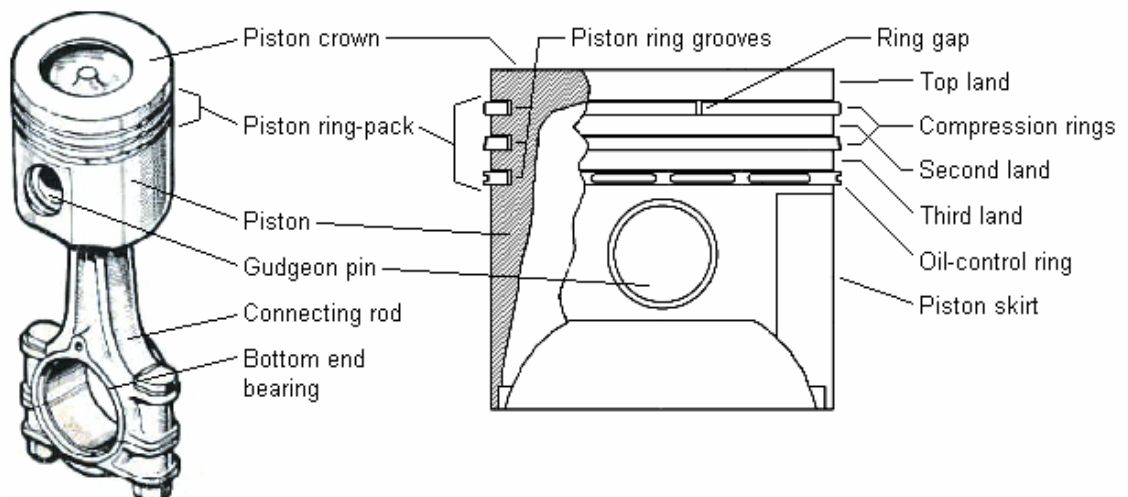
Schematics illustrating piston and connecting rod assemblies, and typical piston ring-pack arrangement for a four-stroke, diesel engine.
